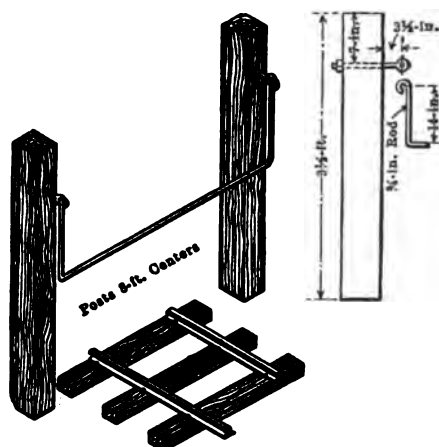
A SIMPLE IRON SHAFT GUARD.
